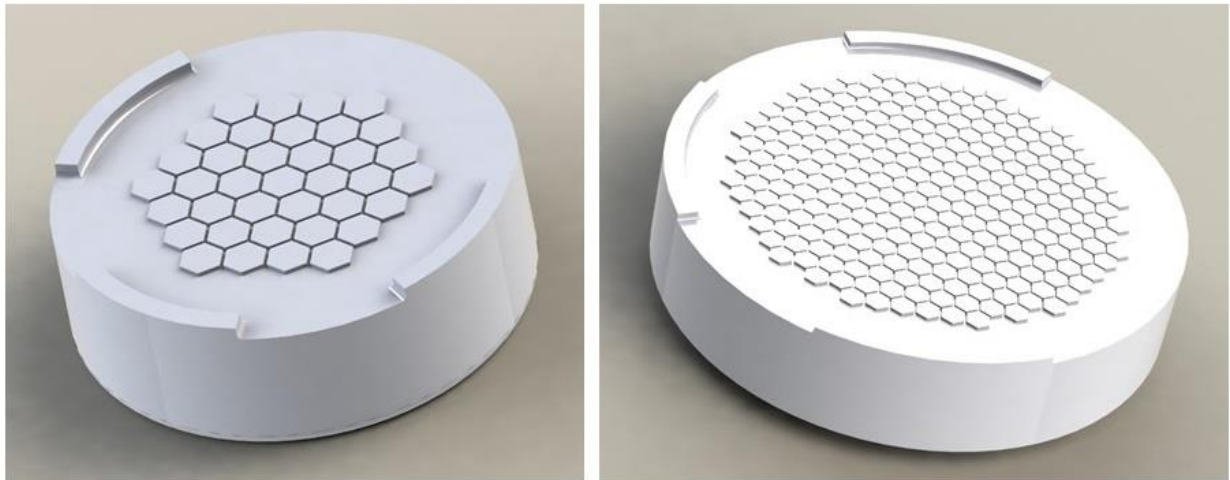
Lower plenum CAD models: reduced (37 assemblies) and full version (253 assemblies)
